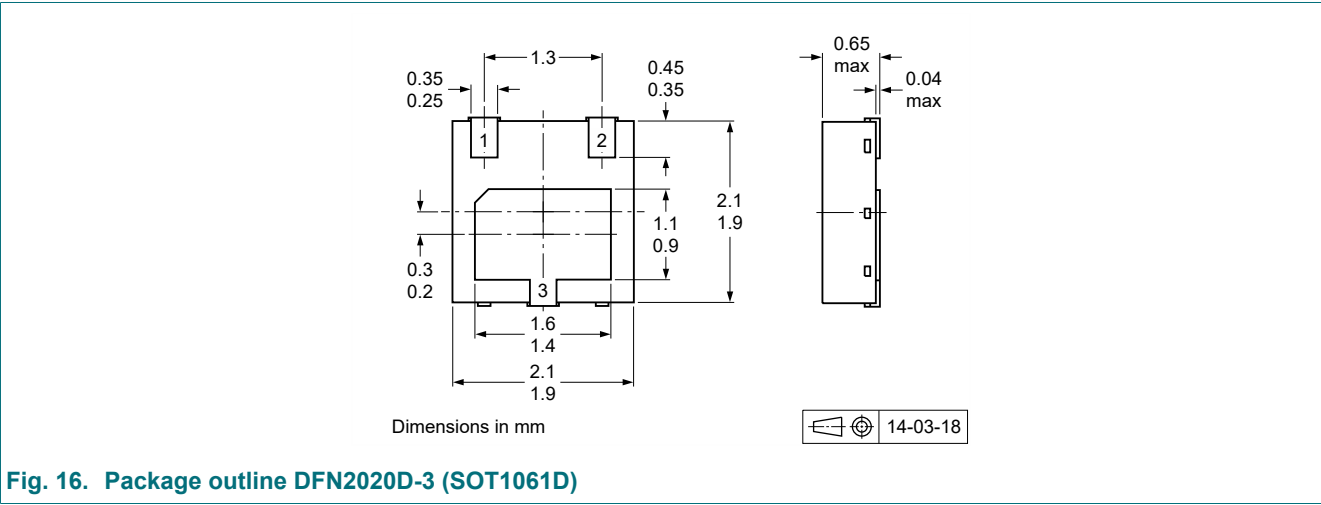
Package outline DFN2020D-3 (SOT1061D)
